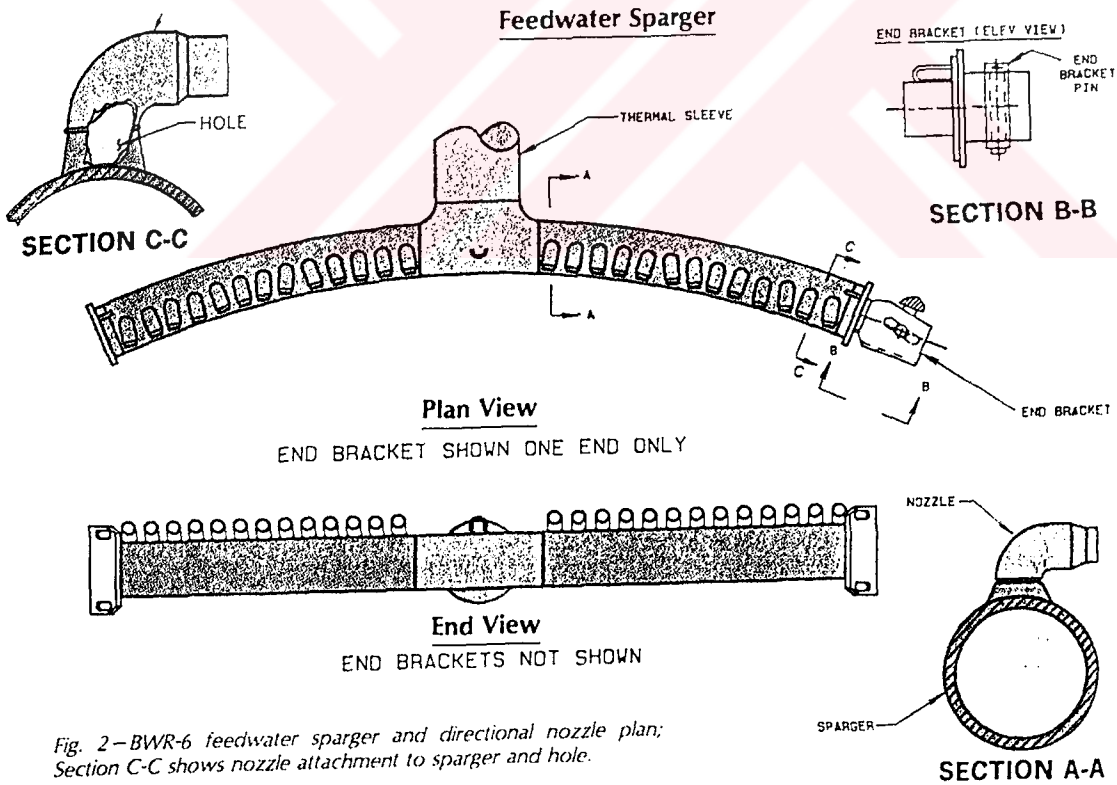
BWR-6 feedwater sparger and directional nozzle plan; Section C-C shows nozzle attachment to sparger and hole.
